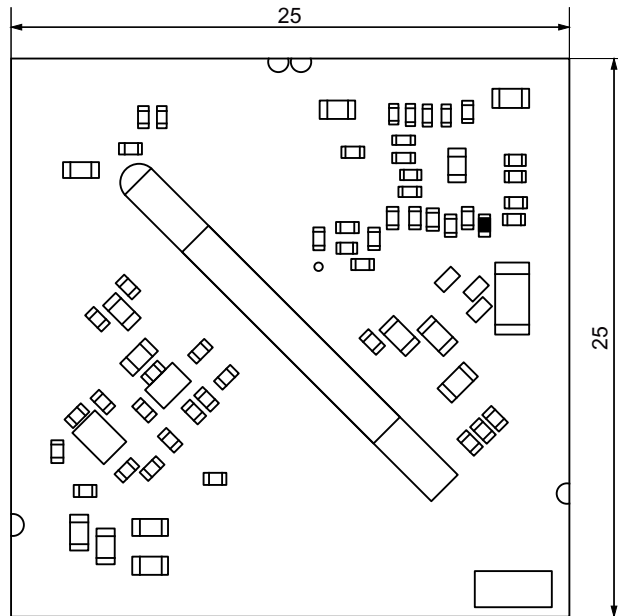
Dimension drawing SIMATIC RTLS PCB OEM AC - All dimensions specified in millimeters
